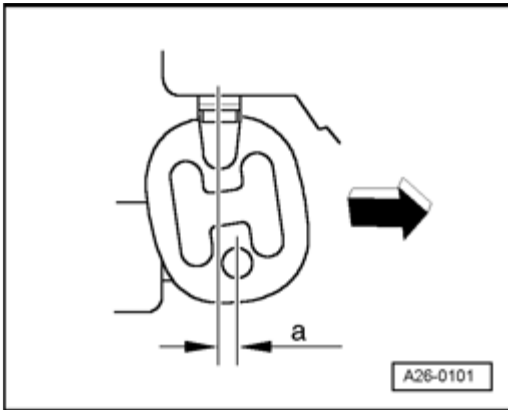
Pushing Exhaust System Toward Front Of Vehicle
